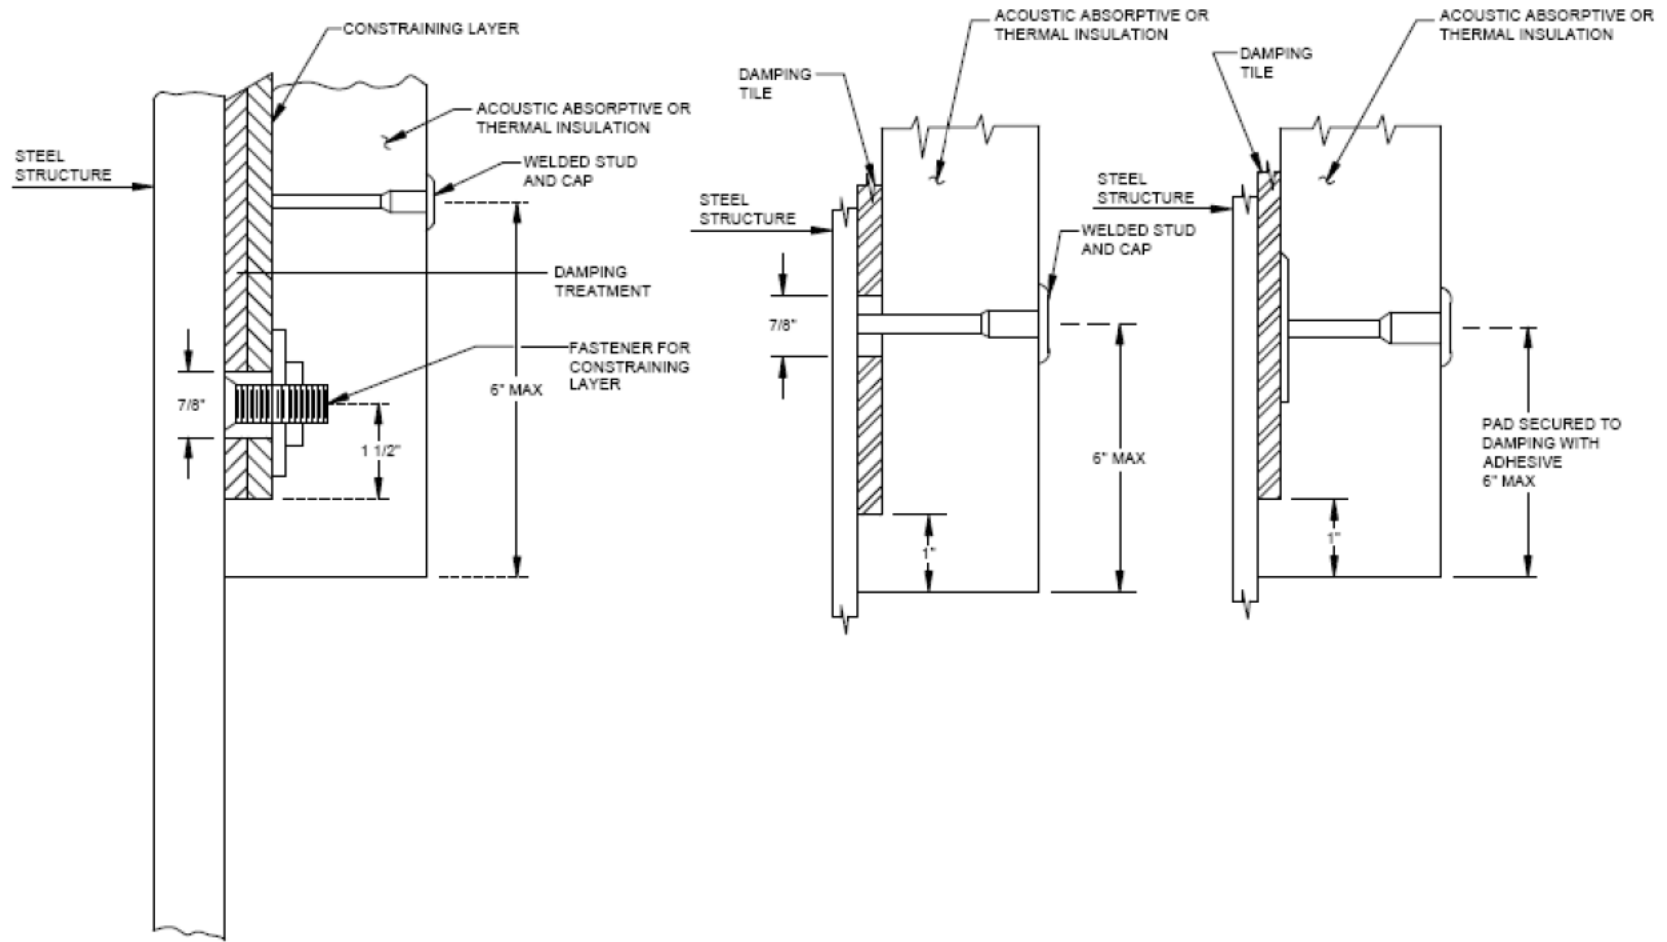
Details of typical installations of constrained and free-layered damping tiles at end of acoustic absorptive or thermal insulation (not to scale).
